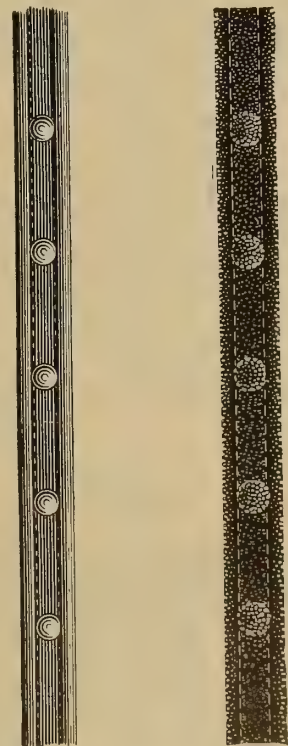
SECTIONAL VIEWS, SHOWING THE USE OF SLAT AND WEBBING AND THE ELASTIC SLAT EDGE.
